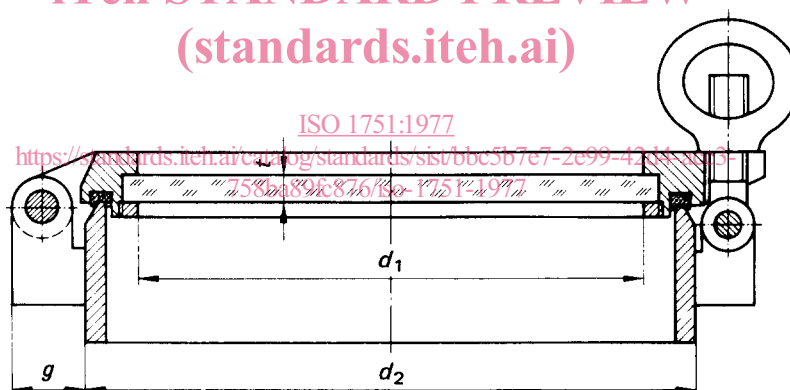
Opening side scuttle without deadlight, welded
